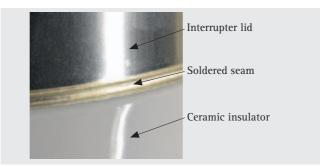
Detailed view of a soldered seam between a stainless steel chamber lid and a ceramic insulator
